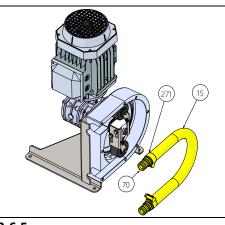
Remove the hose [15] along with the inserts [70] and clamp bands [271].
